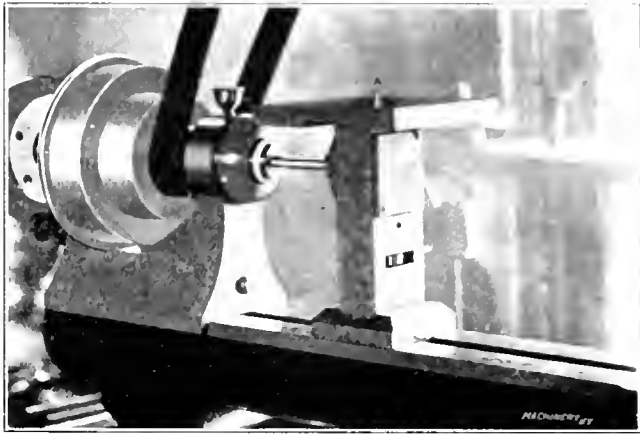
Vertical Milling Attachment for Machining the Stripper Plates
